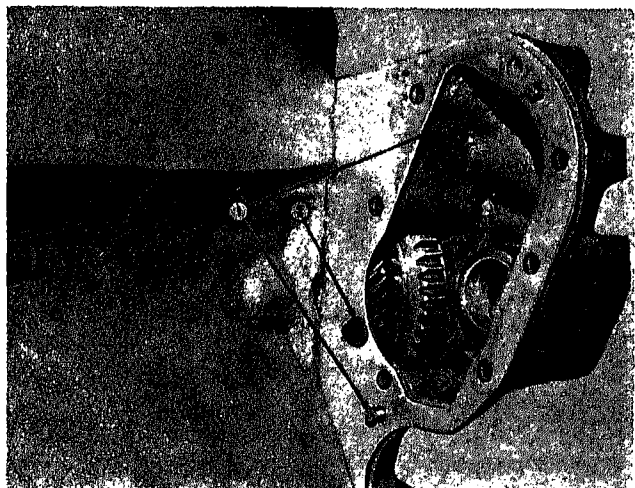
Supercharger locating dowels and oil ferrule
